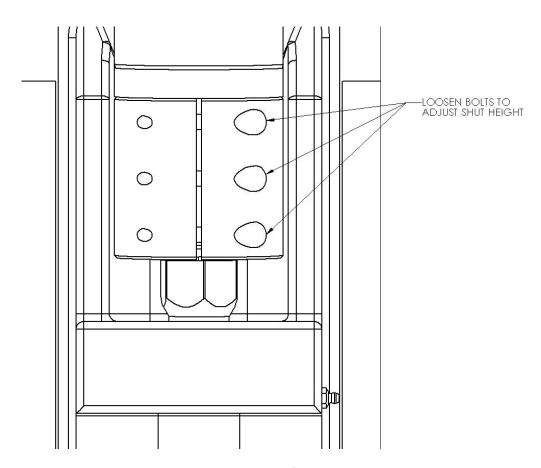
Ball Screw Clamp for Models 22-S and Up
